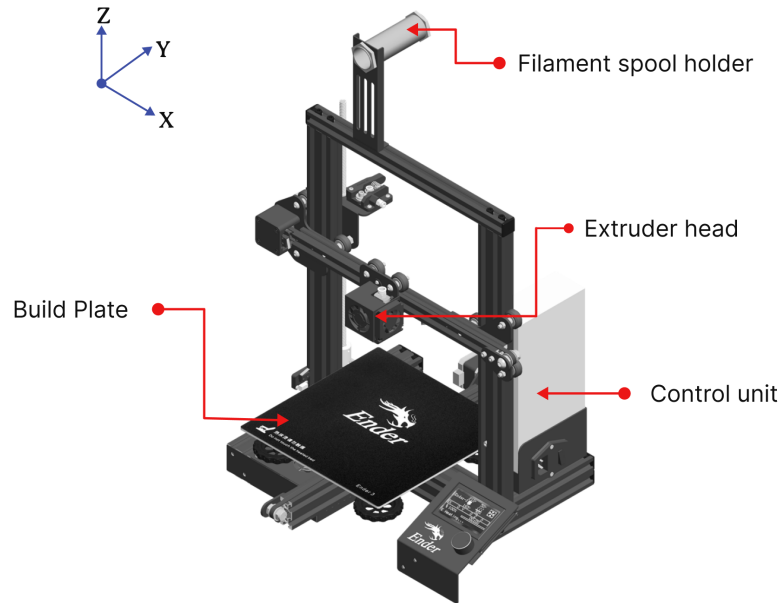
A CAD model representing the FDM printer employed in this study.
